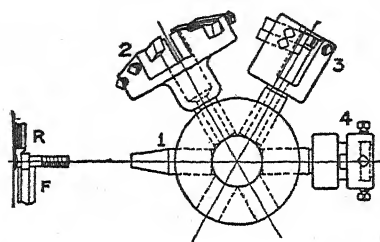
Tool Setup for Making Brass Screws in the No. 2 Brown and Sharpe Automatic Screw Machine.
